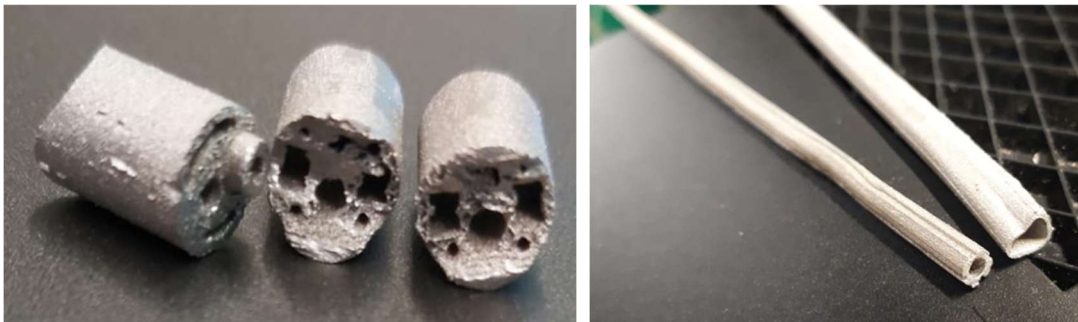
DMLS 3D printed parts with 316L material, the left subfigure shows the defected small segments, the right one is the defected inner and outer pieces of the guide part
